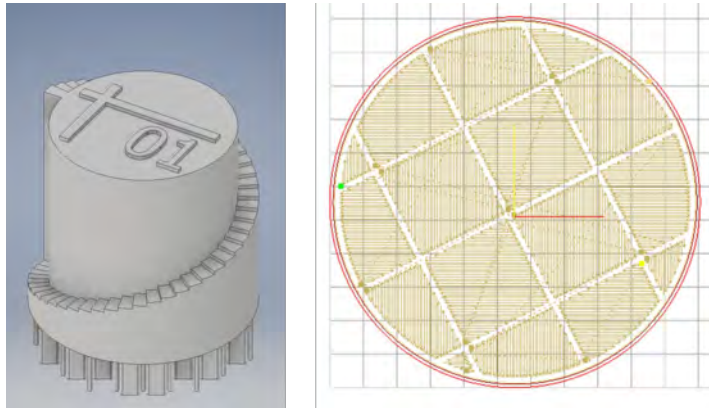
Model of sample geometry and the hatch strategy. The layer height is 50 μm . The hatches of one layer are made up of patches of 3 mm by 3 mm. At the end of a layer the contour is welded. The welding direction is rotated by 79 ° for the next layer.
